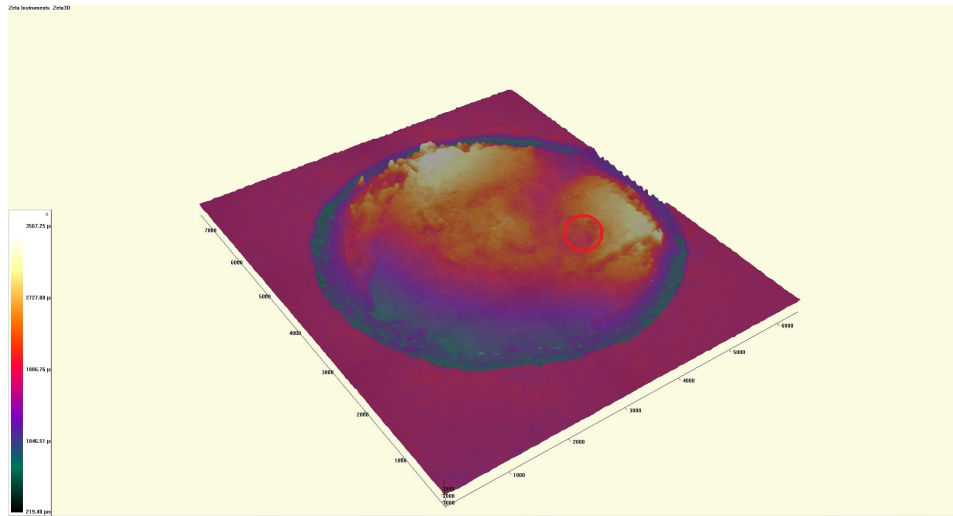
Pore zone selection from fracture surface of a 95% porosity, 150°C specimen.
